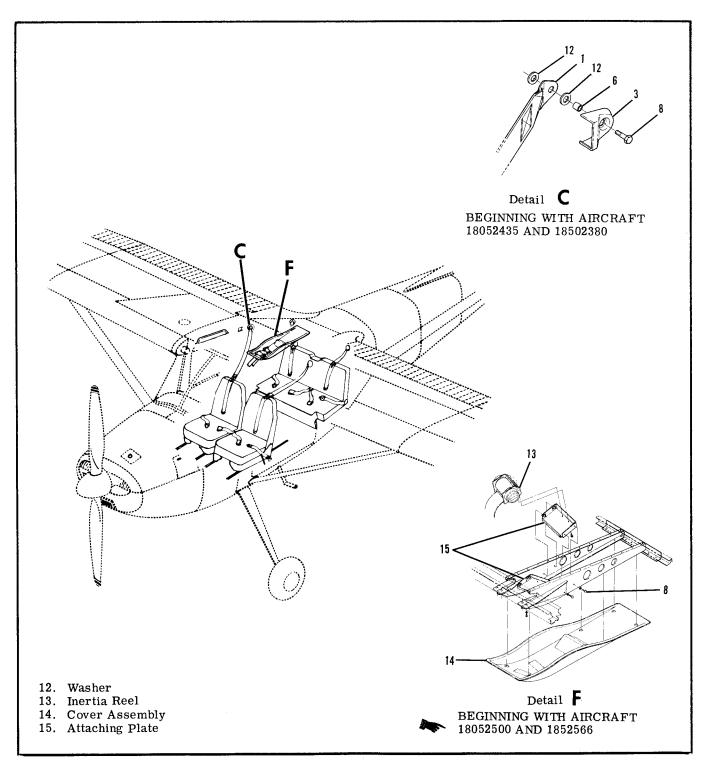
Shoulder Harness Installation(Sheet 2 of 2)
